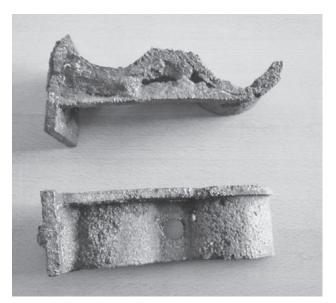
Incomplete molding and holes in the castings obtained by casting in sand-clay molds
